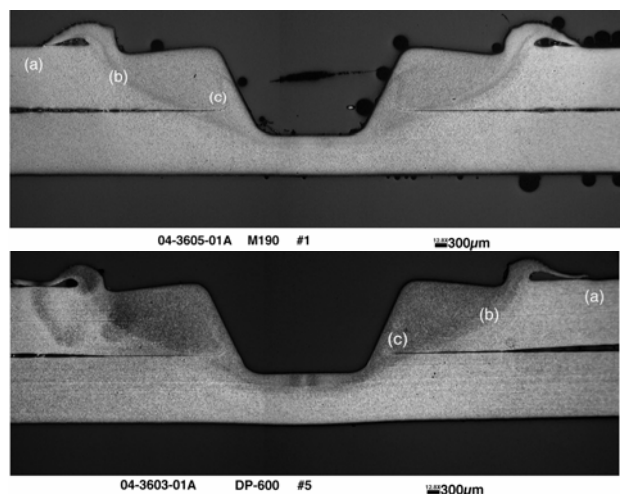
Cross-section of FSSW. Top: M-19; bottom: DP600. Welding time: 2.1 sec.
